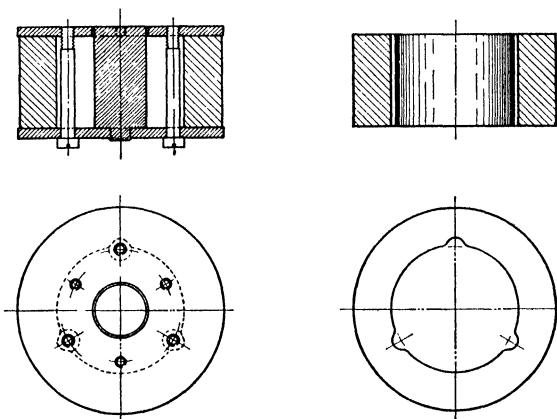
Typical modern ring-type moving-coil loud-speaker magnet showing ring separately.
